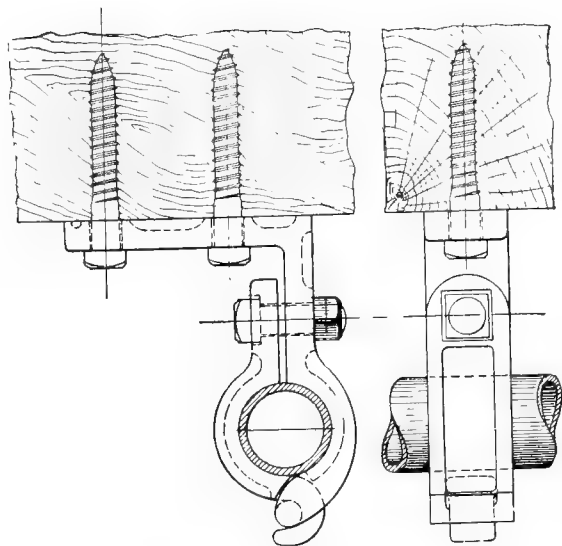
Acme Pipe Clamp for Use on Bottom of End Sill.
